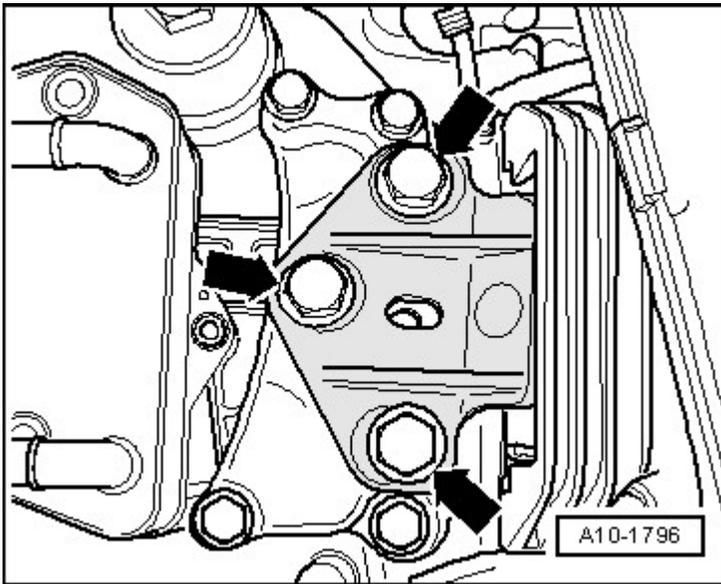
Identifying Engine Mount To Engine Mount Bracket Bolts
